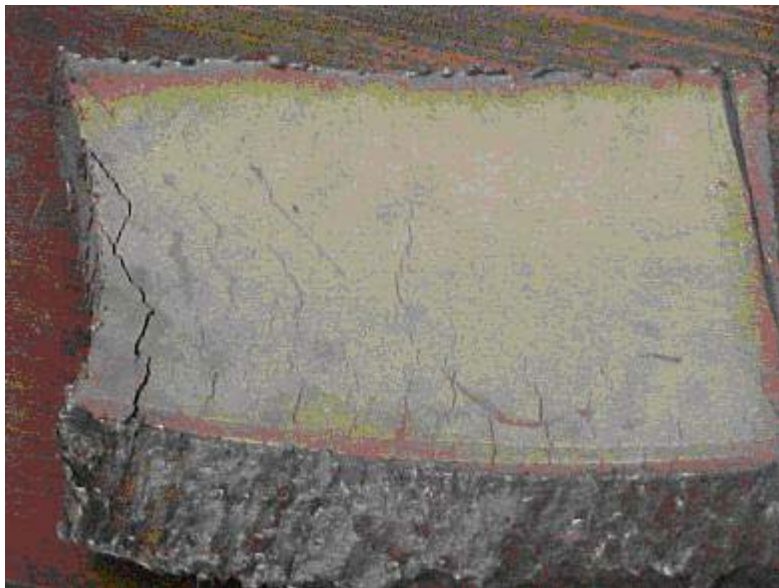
Heavy wall stainless steel pipe showing Thermal fatigue cracks on the inside surface [8].
